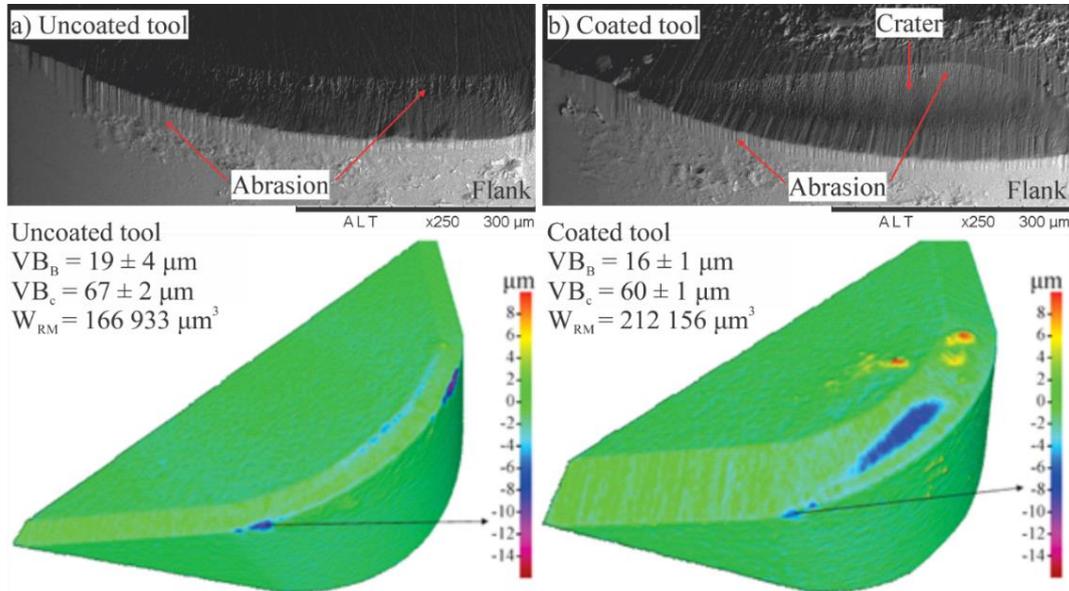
Tool wear morphology and tool wear parameters (VB_B , VB_C and W_{RM}) of the uncoated and coated tools applied in turning of AISI 4340 - 55 HRC ($v_c = 150$ m/min, $f = 0.08$ mm/rev, $a_p = 0.20$ mm, machining time = 3.6 min).
